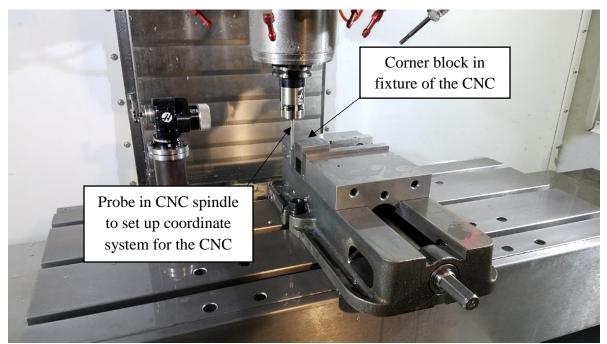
The probe located in the spindle is touching off a corner block in the CNC to give a reference location to perform the drilling operation.
